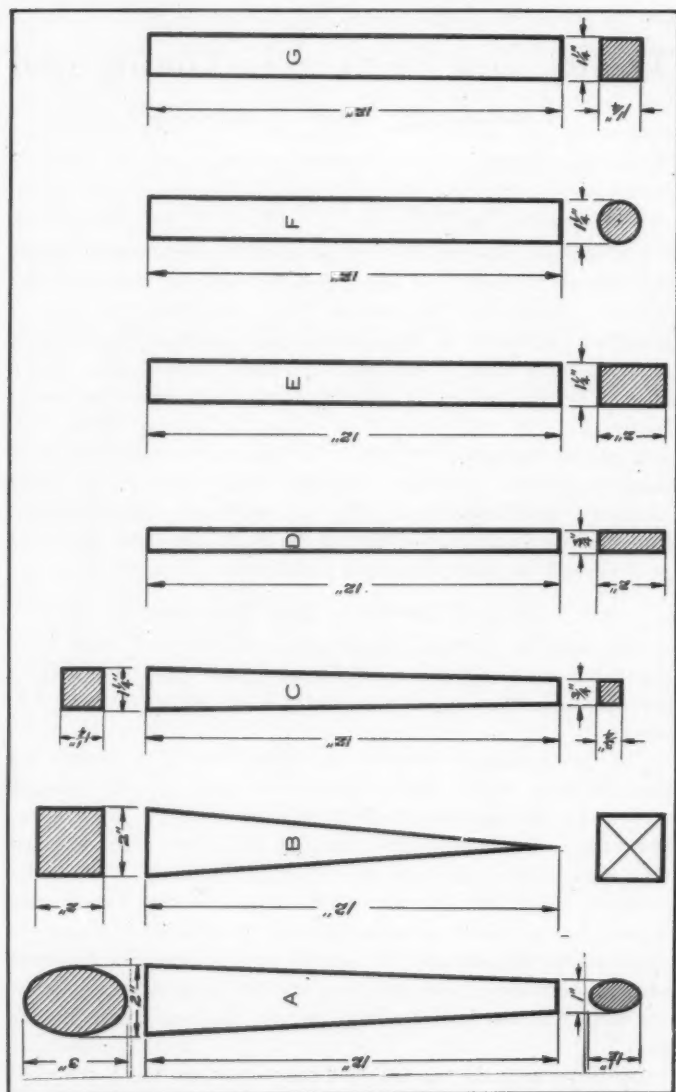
DIAGRAM OF OPEN MOLD TEST BARS SHOWING SIZES
